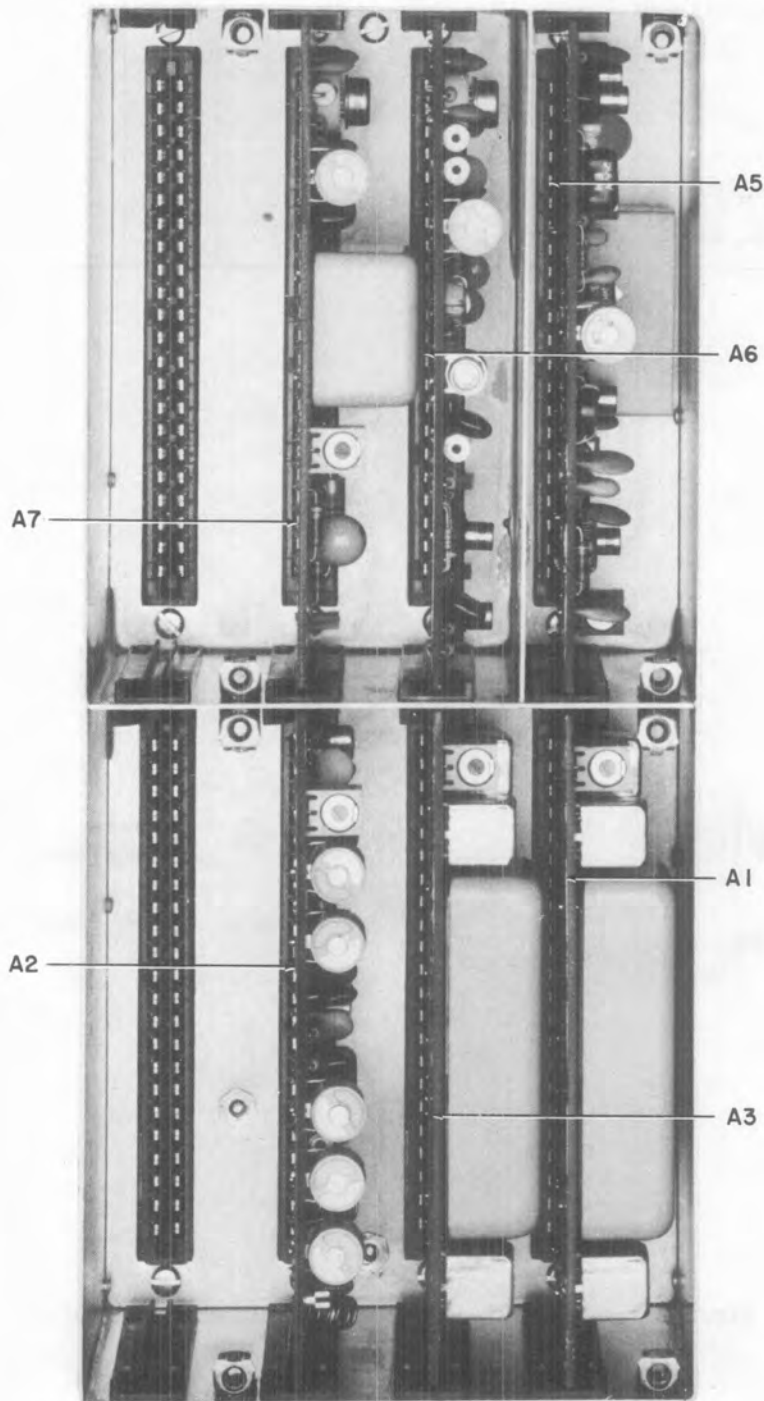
Type 72346 IF Amplifier Assembly (A2), Top View, Component Locations
